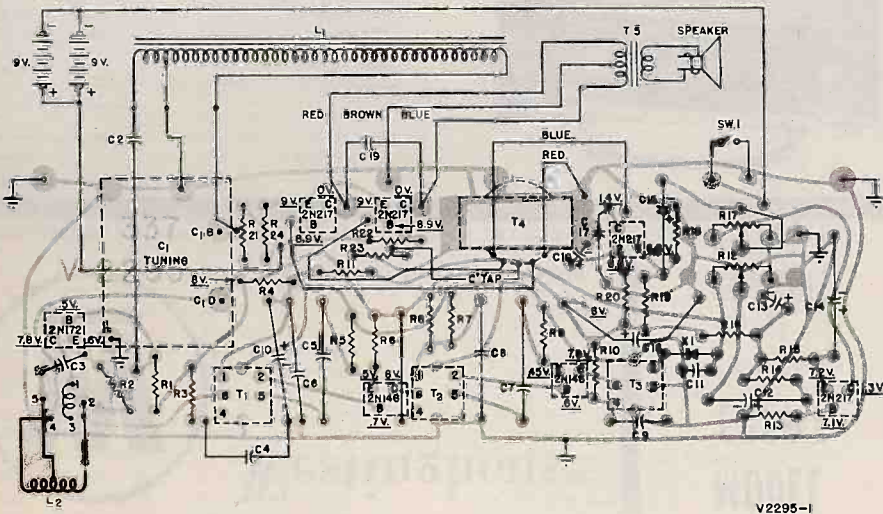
Bottom View of Printed Board Showing Top Components Symbolically
